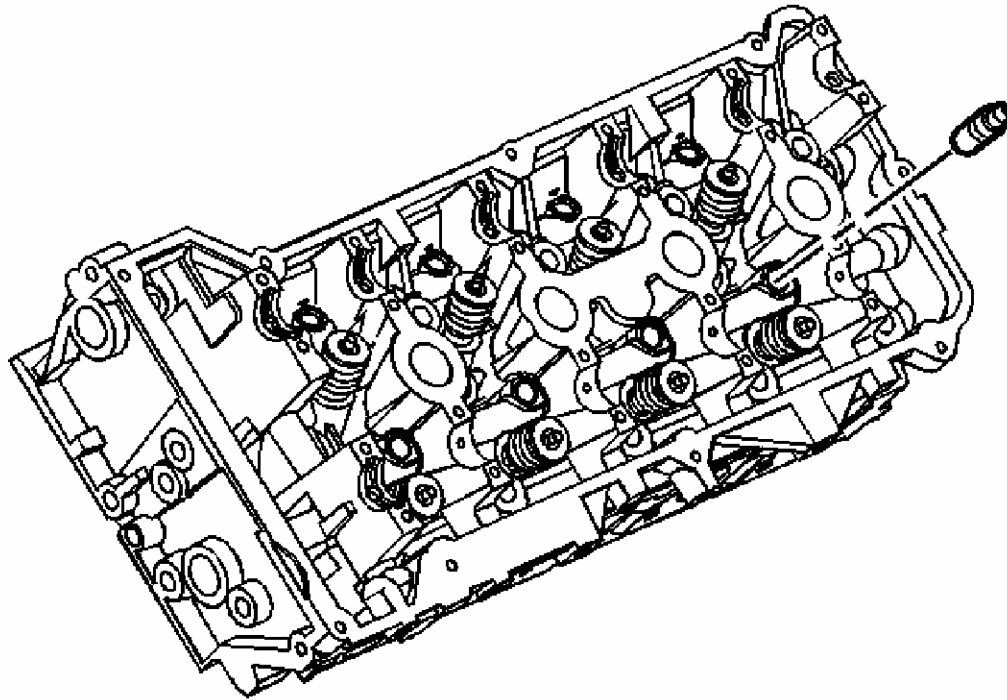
Locating Left Stationary Hydraulic Lash Adjusters (SHLA)
